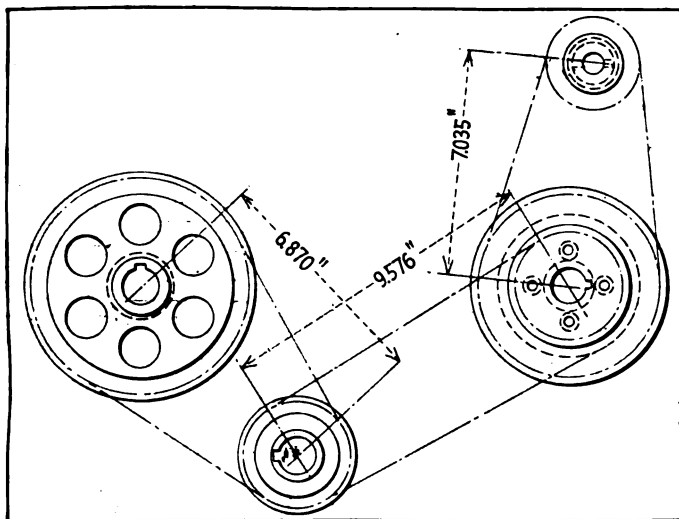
Schematic view of chain drive used for actuating the sleeve-eccentric and magneto shafts
